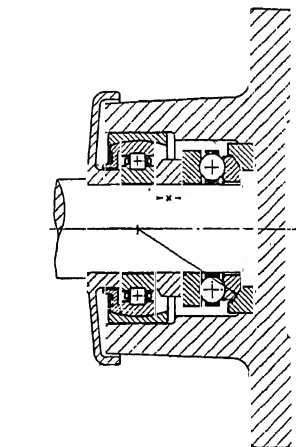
A footstep arrangement incorporating a self-aligning roller journal and ball thrust bearing.
